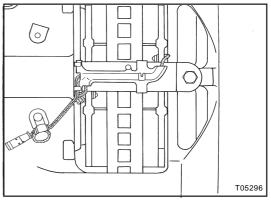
A: Pad wear indicator cable installation (early type of cable holder)
